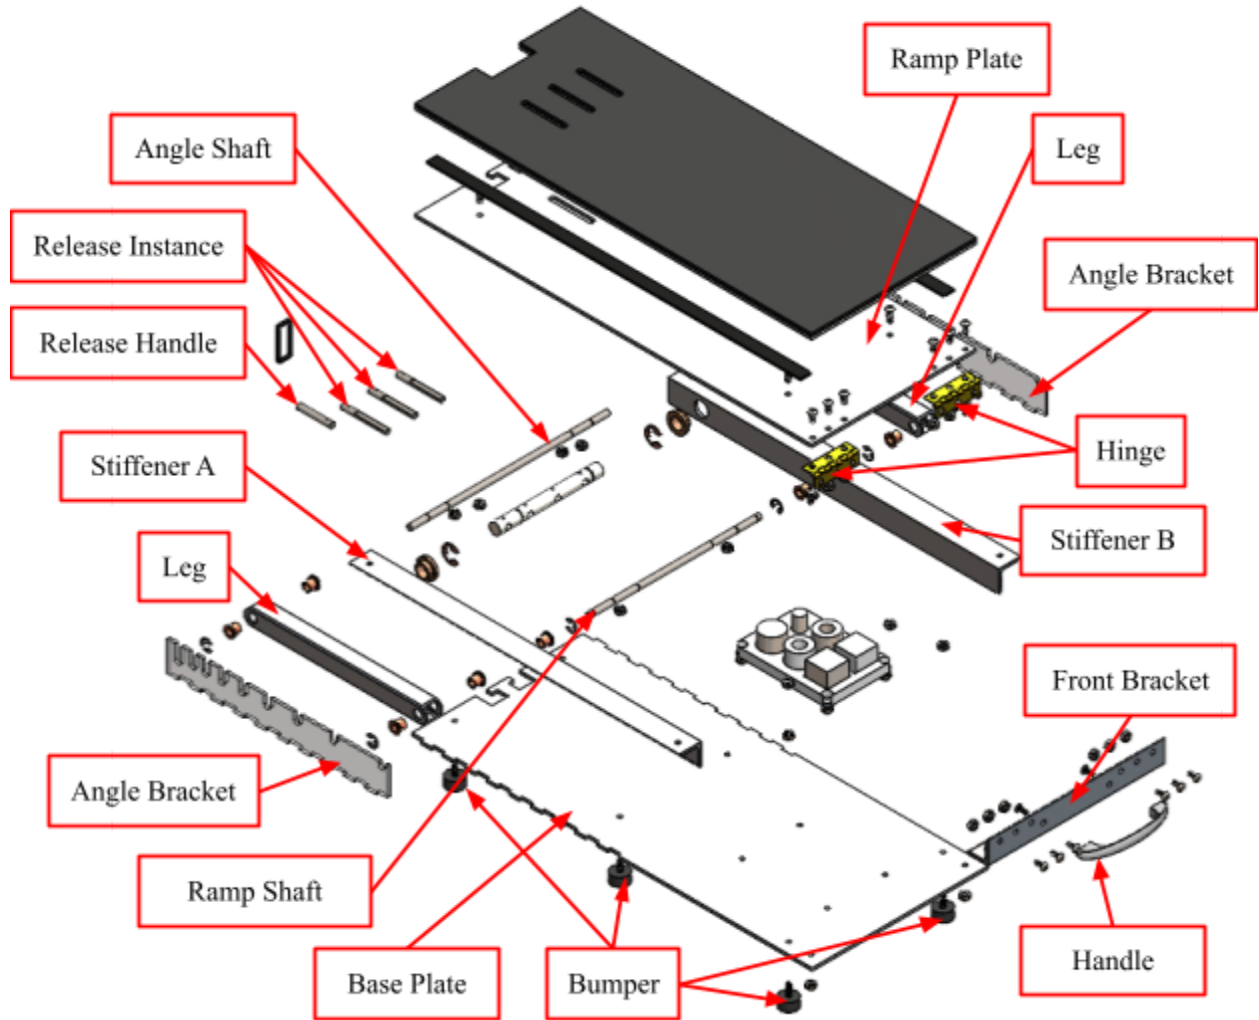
An exploded assembly of the variable ramp. Key components are identified.
